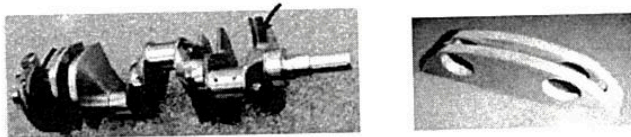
Crankshaft used in the engine with two pendulum attached (left) and one of the pendulum absorbers used on the crankshaft (right), Ford Motor Co [6]
